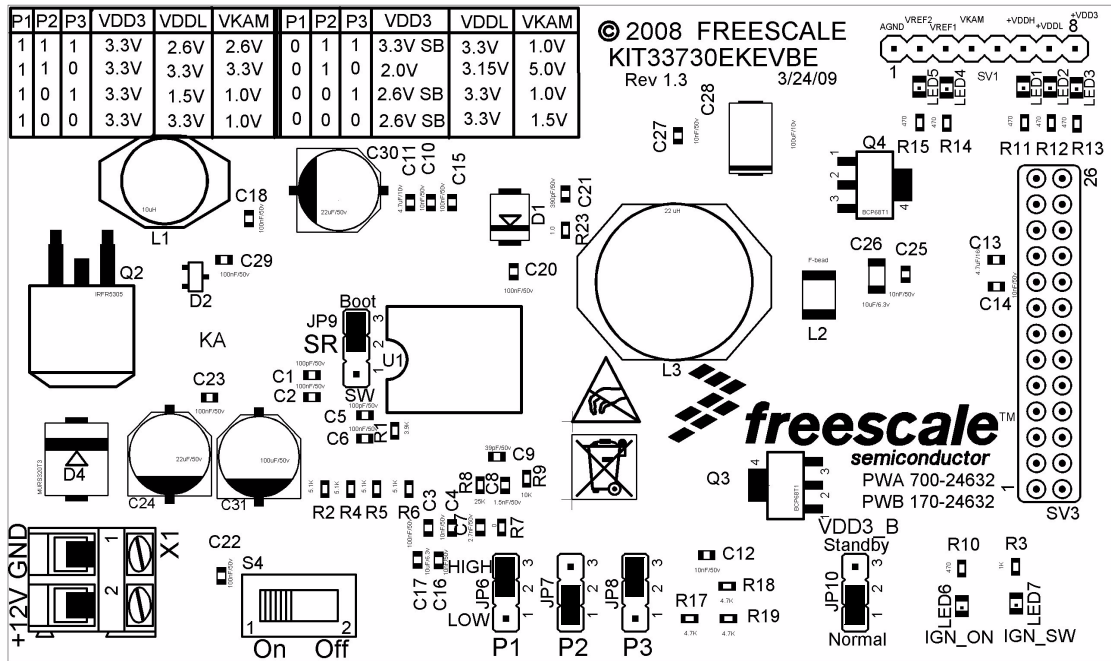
The Assembly Drawing of the KIT33730EKEVBE Evaluation Board
